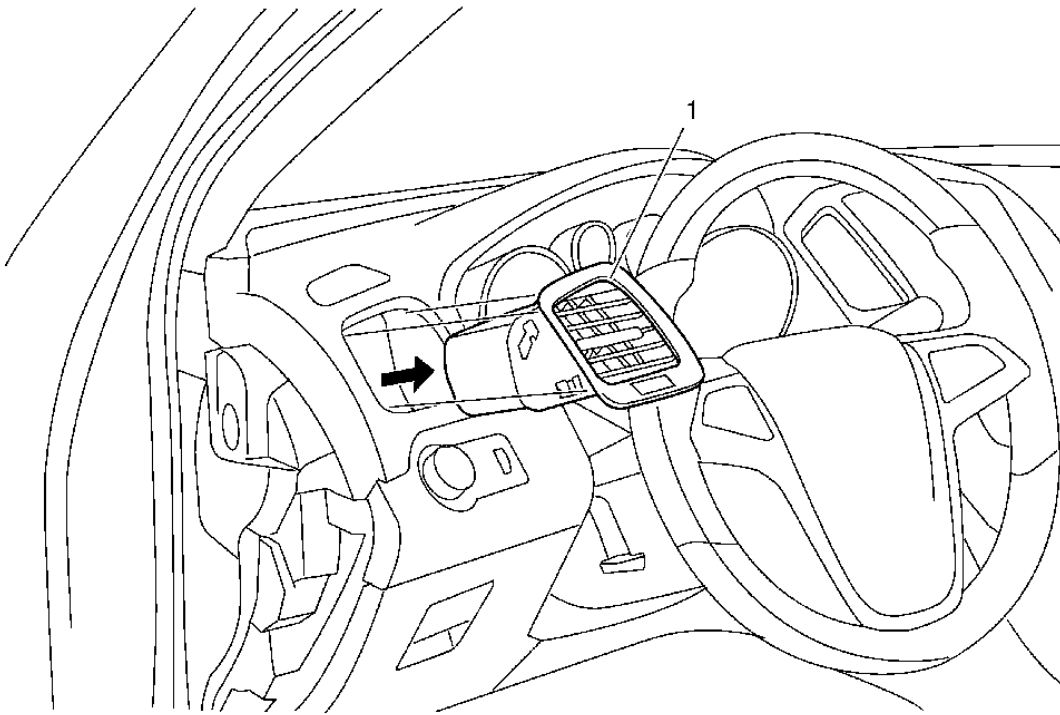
Instrument Panel Outer Air Outlet Deflector - Left Side
